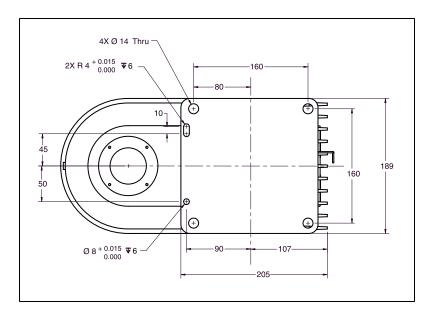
Mounting Hole Dimensions, Inverted Robot
